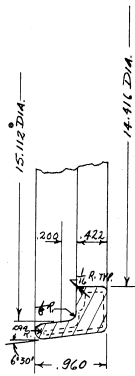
P/N 226966 - Flange, Combustion Chamber Heat Shield Ass'y, Material Ti-A70
